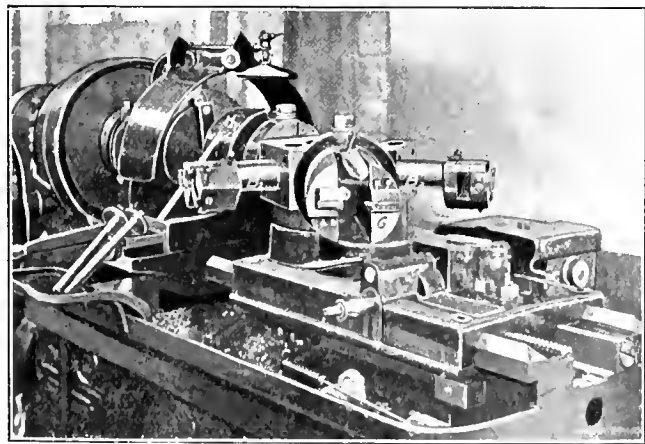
Rough-turning and Centering the Spindles on the Potter & Johnston Automatic Chucking Machine
